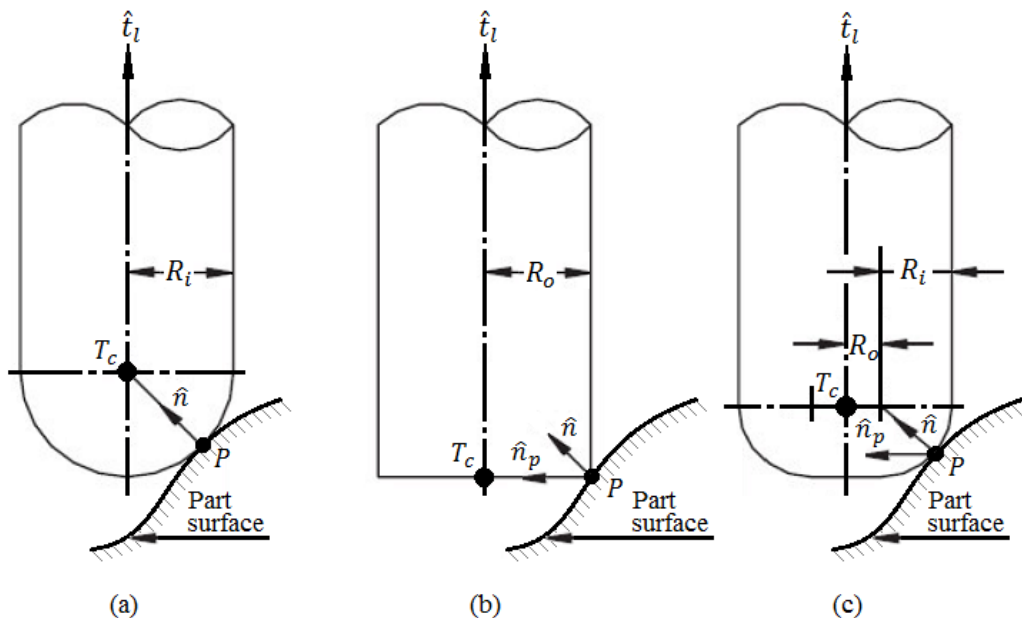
The concept of cutter contact (CC) point and cutter location (CL) point for: (a) ball end mill, (b) flat end mill, (c) radiused end mill cutter.
